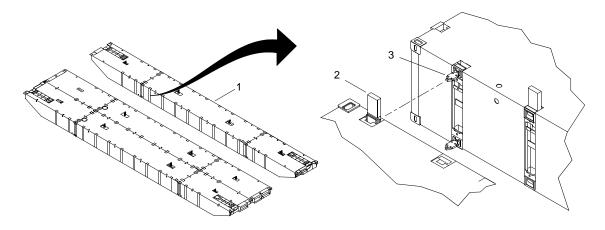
Assembly of Intermediate Section on a Sealift Vessel
